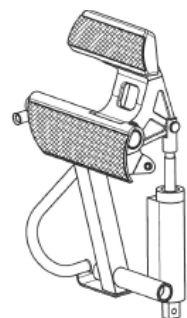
Pedal Assembly - Removal/Installation (Sheet 1)
